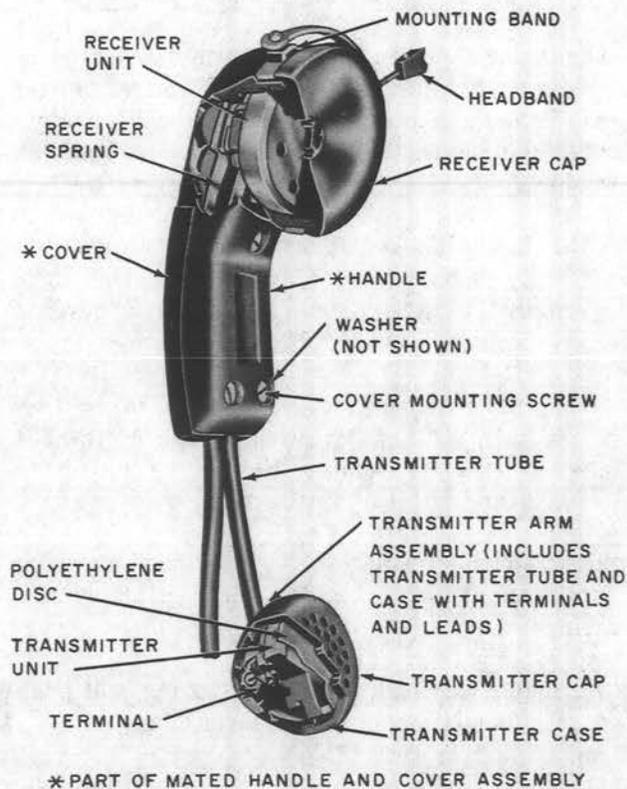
Handle, Cover, and Transmitter Arm Assembly of 53-Type Head Telephone Sets Except 53R
